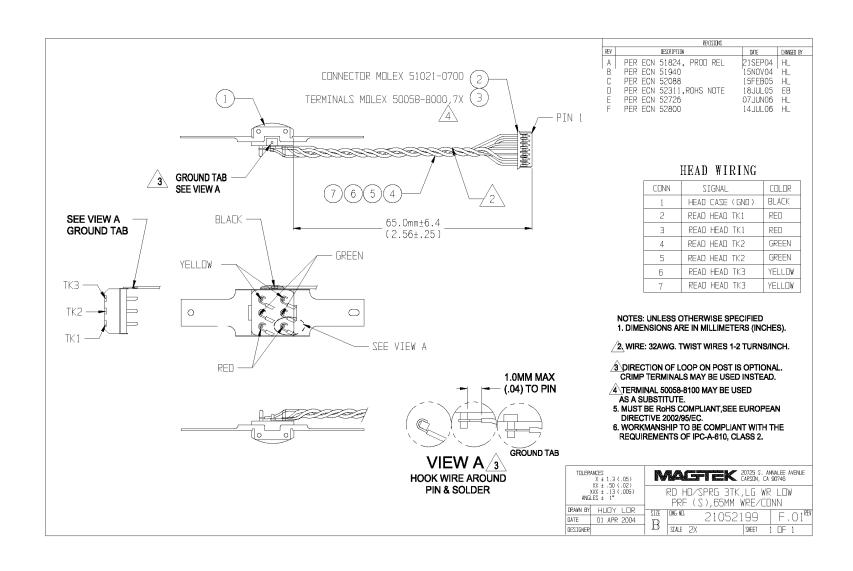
3-Track Read Head Assembly with Cable and 7-Pin Connector
